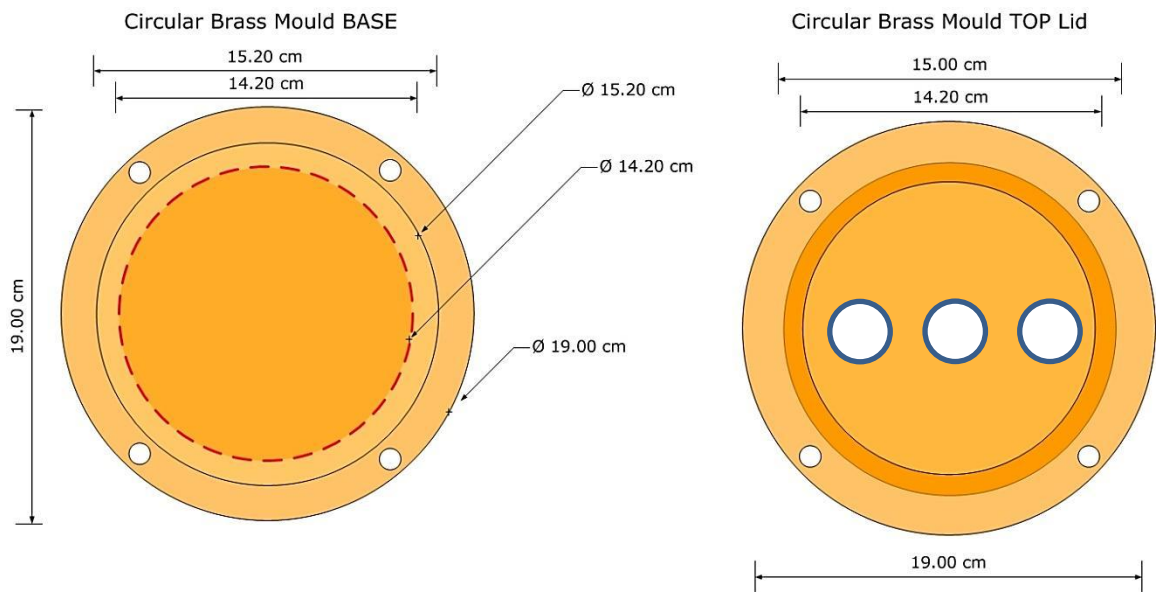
Circular Mould parts. Base (L) and Lid (R). The O-ring is shown (red dashed line). The 3 circles on the right represent the 26 mm (not in scale) disks (inlet, central and outlet section) used for structural and mechanical investigation.
